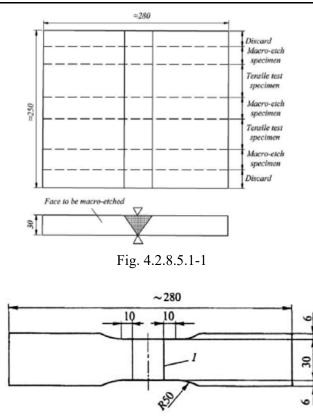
Tensile test specimen: 1 – weld edge
